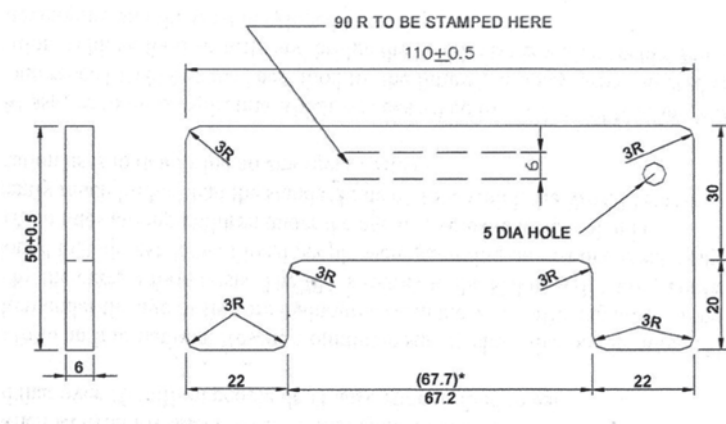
(c) Head Width Checking Gauge For 90 R Rails
